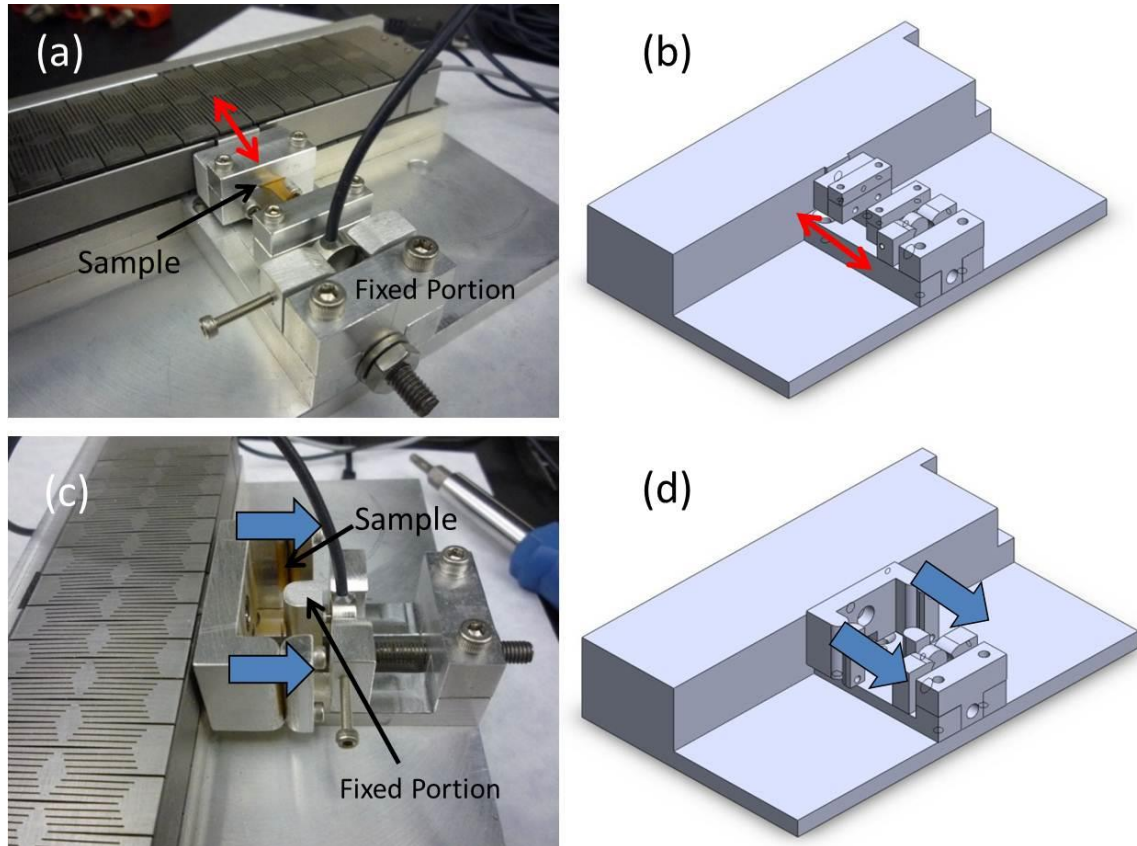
Cyclic fatigue tester for both tensile and bending testings: (a) Real product (b) CAD design of tensile tester; (c) real product and (d) CAD design of bending tester. All the arrows indicate the loading direction.
